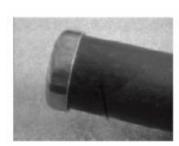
(left) & 4 (below) - Use a length of 38mm diameter steel pipe to drive the Freeze Plug into the engine's inner bore.
